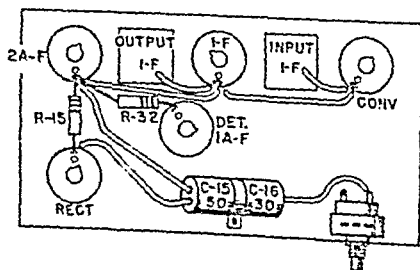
Bottom view of a conventionally wired a-c/d-c receiver showing the B+ wiring.
